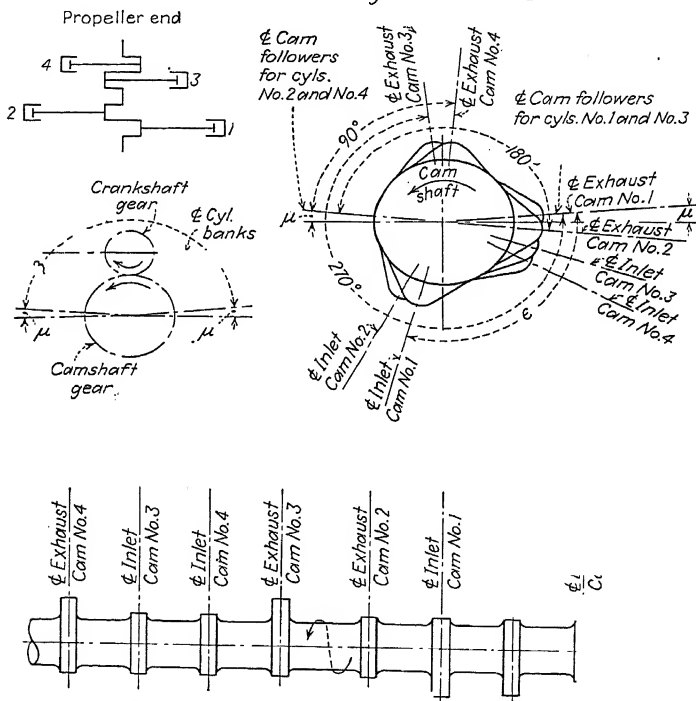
Method of locating the cams on the camshaft of a four-cylinder opposed engine.
